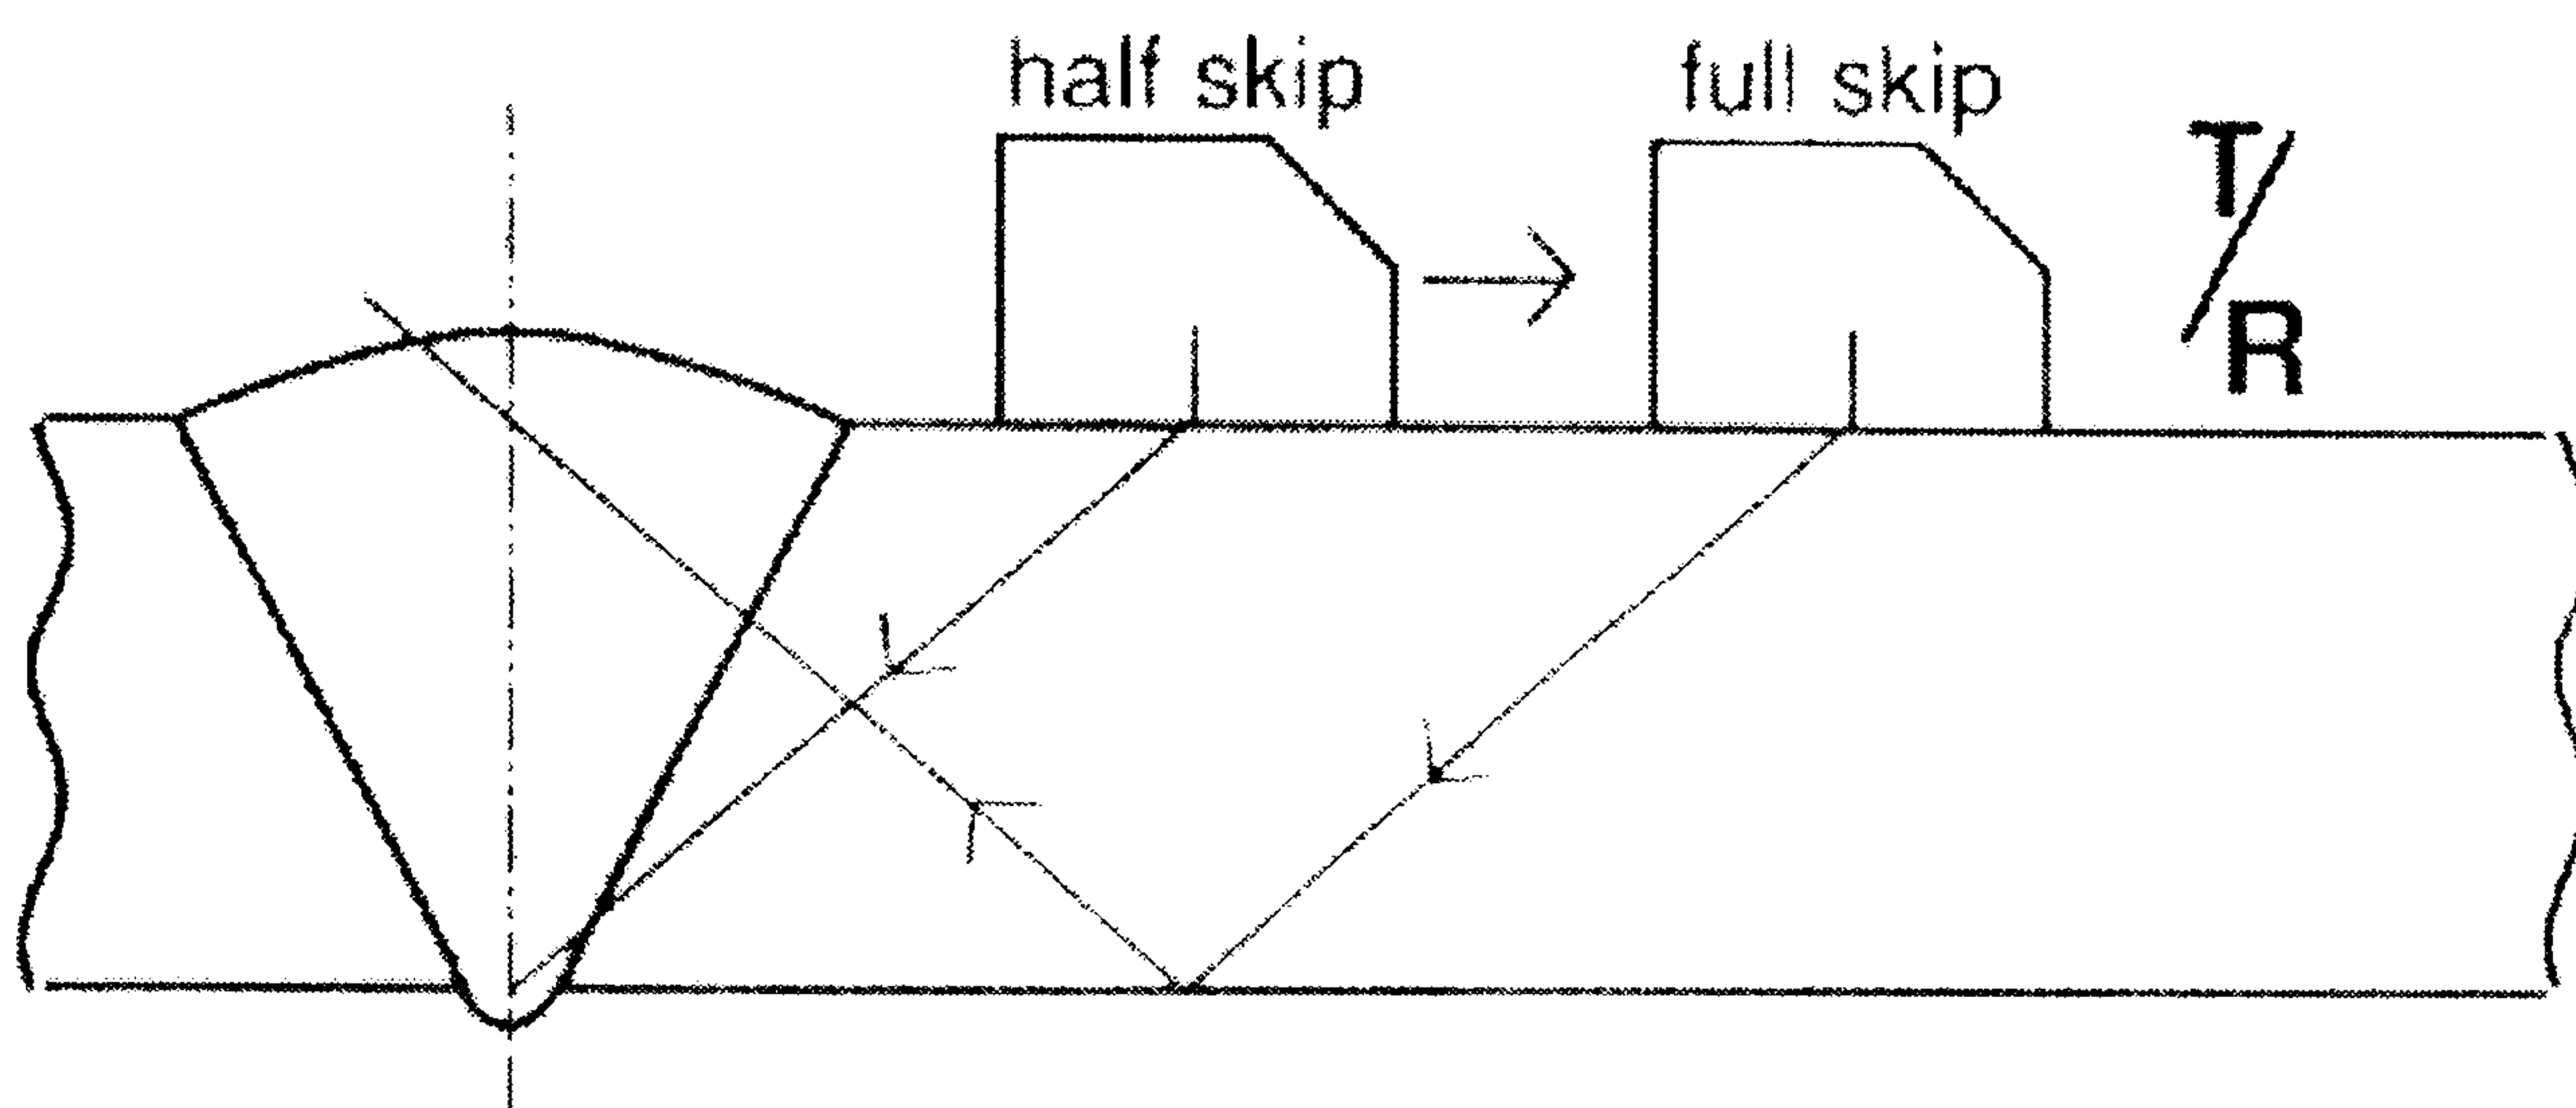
Schematic of angle probe as used for the weld testing application. Cartz [1995]
